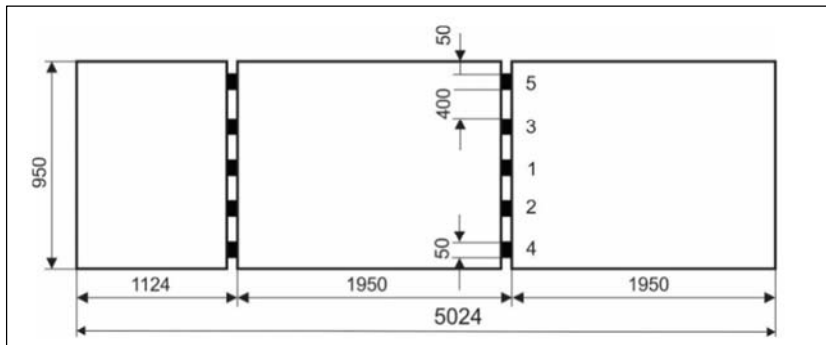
Presentation of the method for welding the two-layer Ti/Č composite
